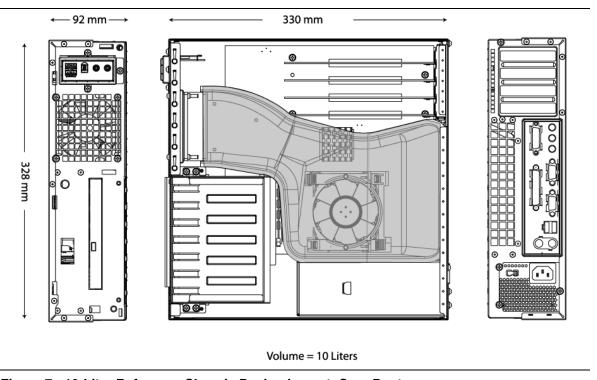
10-Liter Reference Chassis Design Layout, Core Duct
